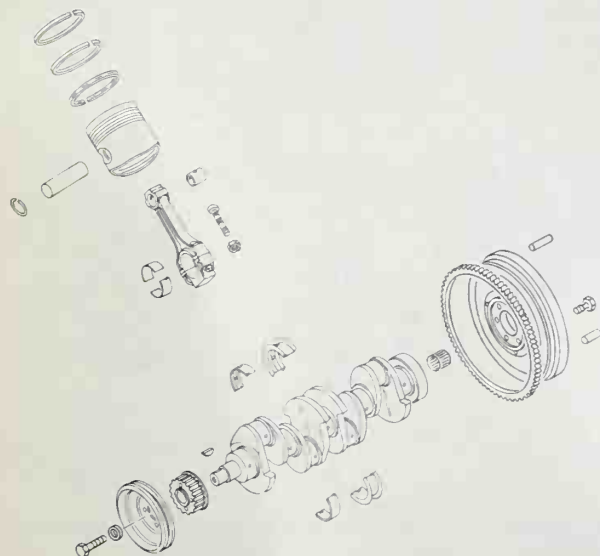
Exploded view of crankshaft, piston and rod assemblies.
